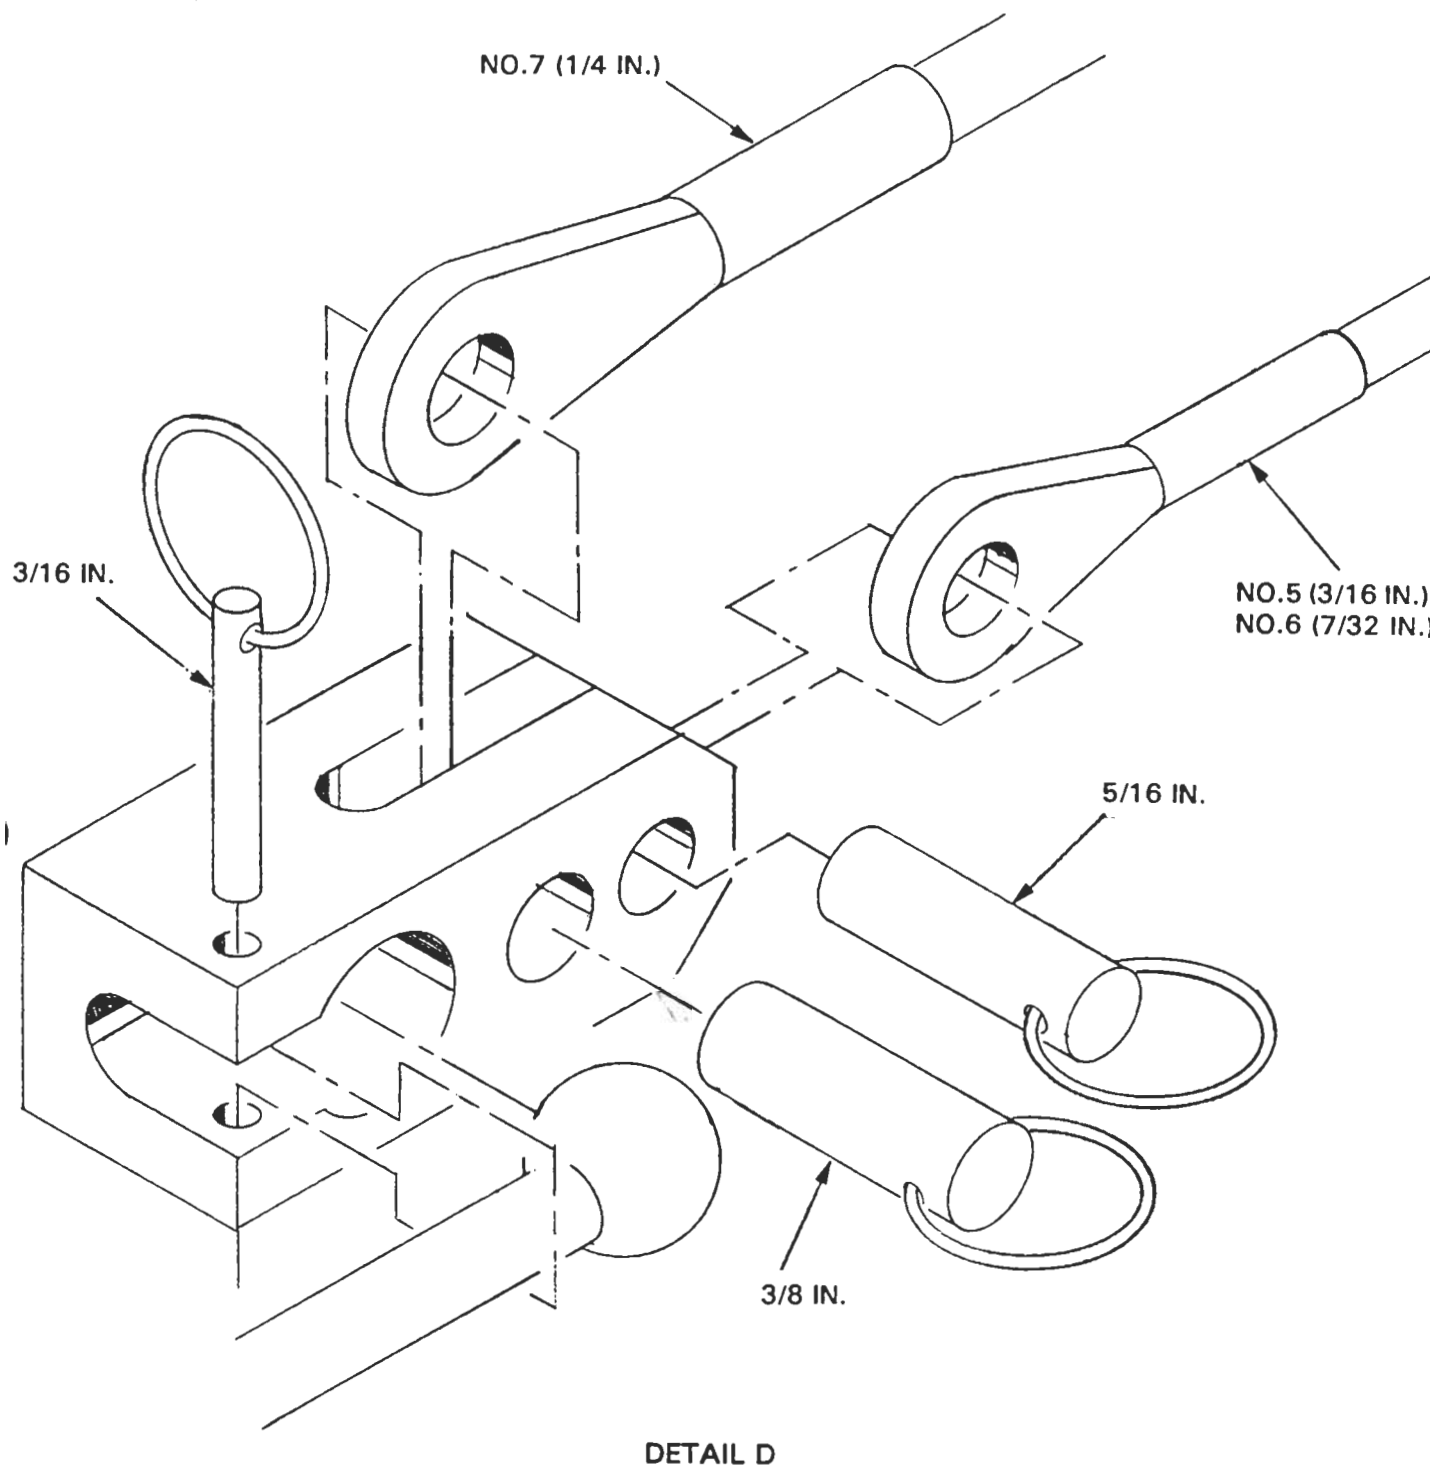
Cable Tensiometer Test Setup (Sheet 4)
